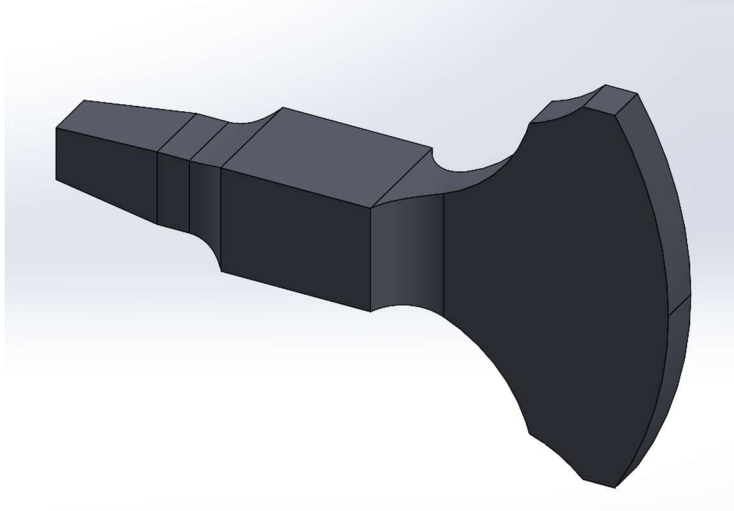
Isometric view of the initial axe head CAD model to be cast.
